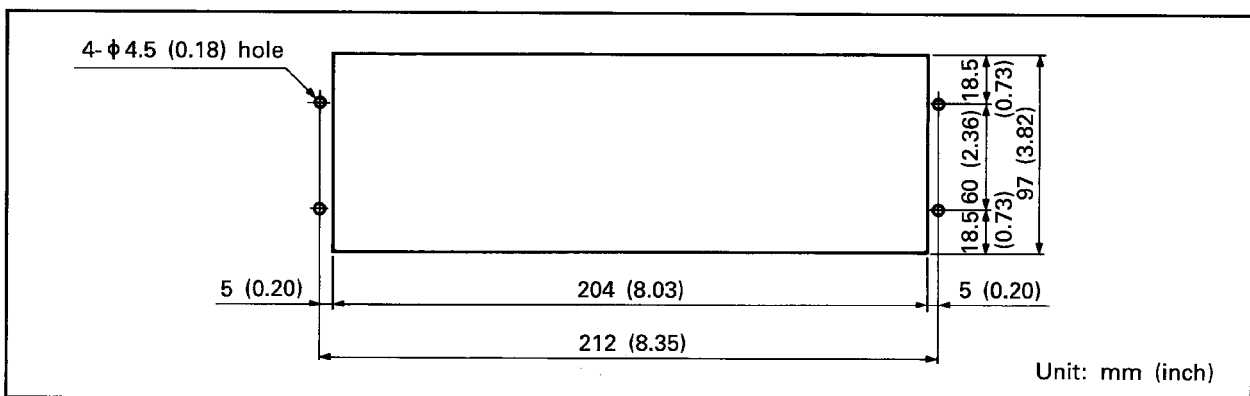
Dimensions for the Operating Box Mounting Hole Positions
